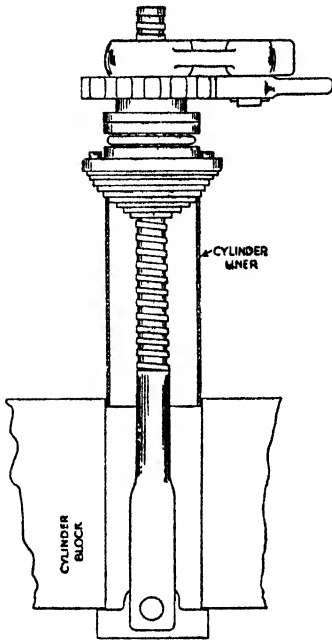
Inserting Cylinder Liner, with Buma Tool
